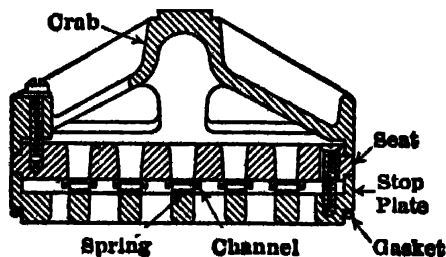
Ingersoll-Rand "Channel Inlet" Plate Valve
